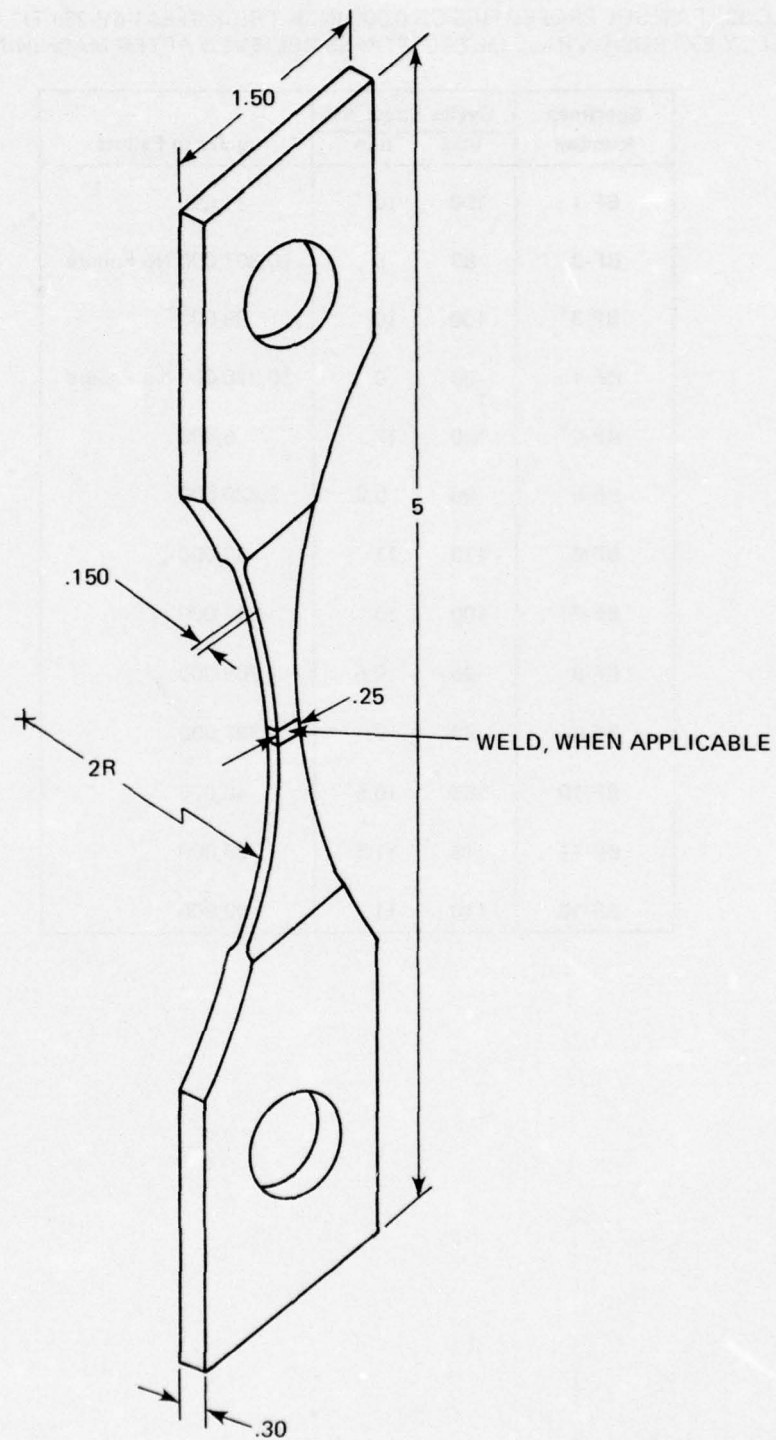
Fatigue Weld Test Specimen (45MPS 240)
